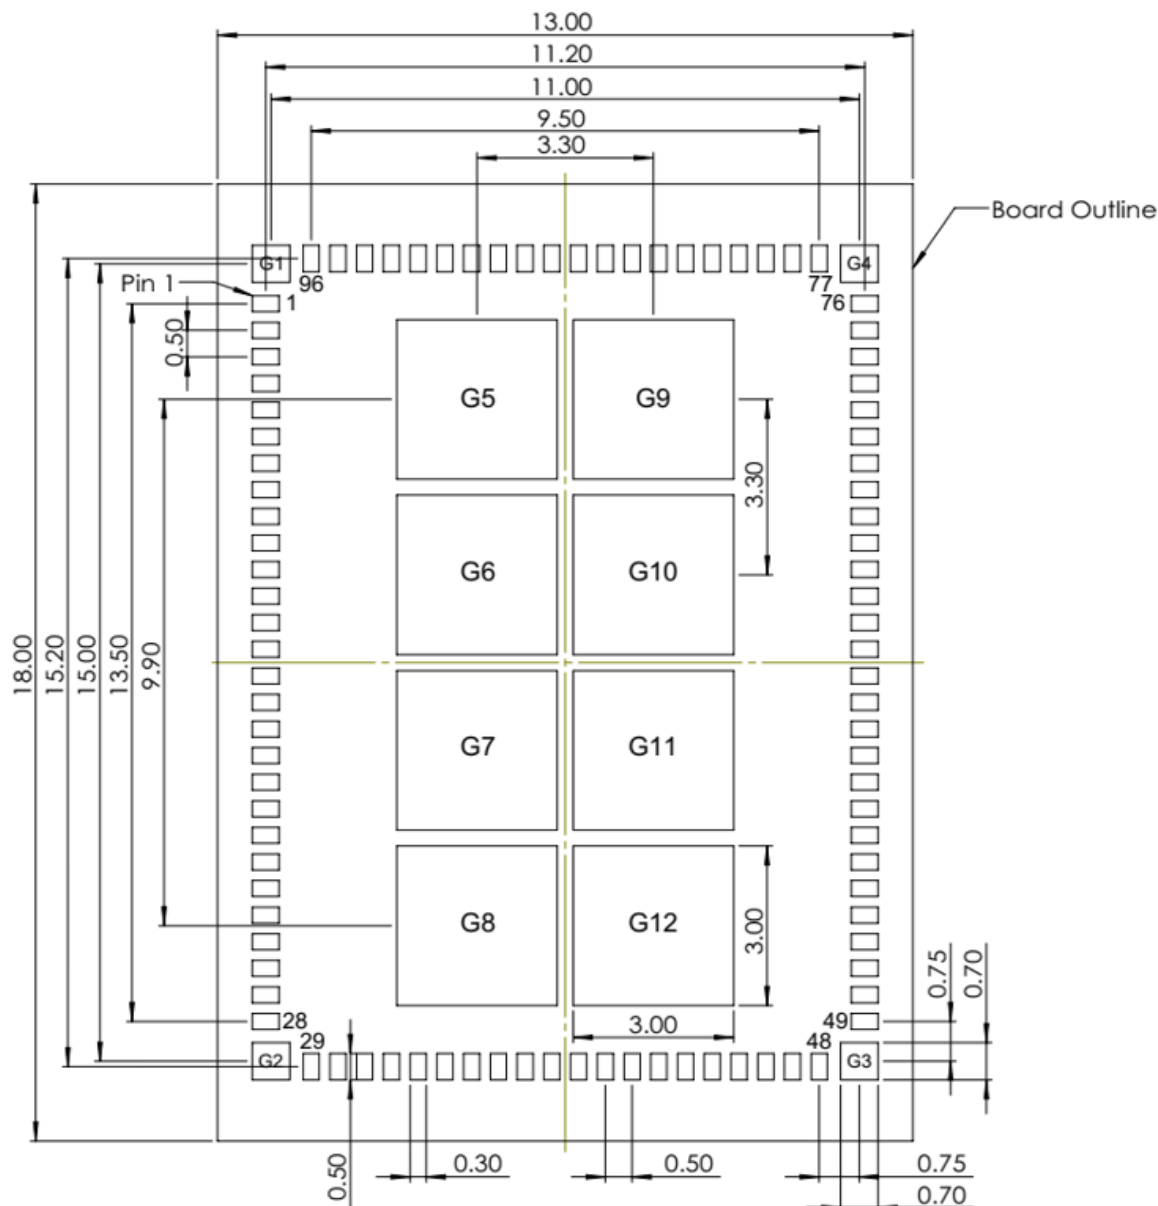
PCB Footprint (Bottom View) - IF573 SMT Module
